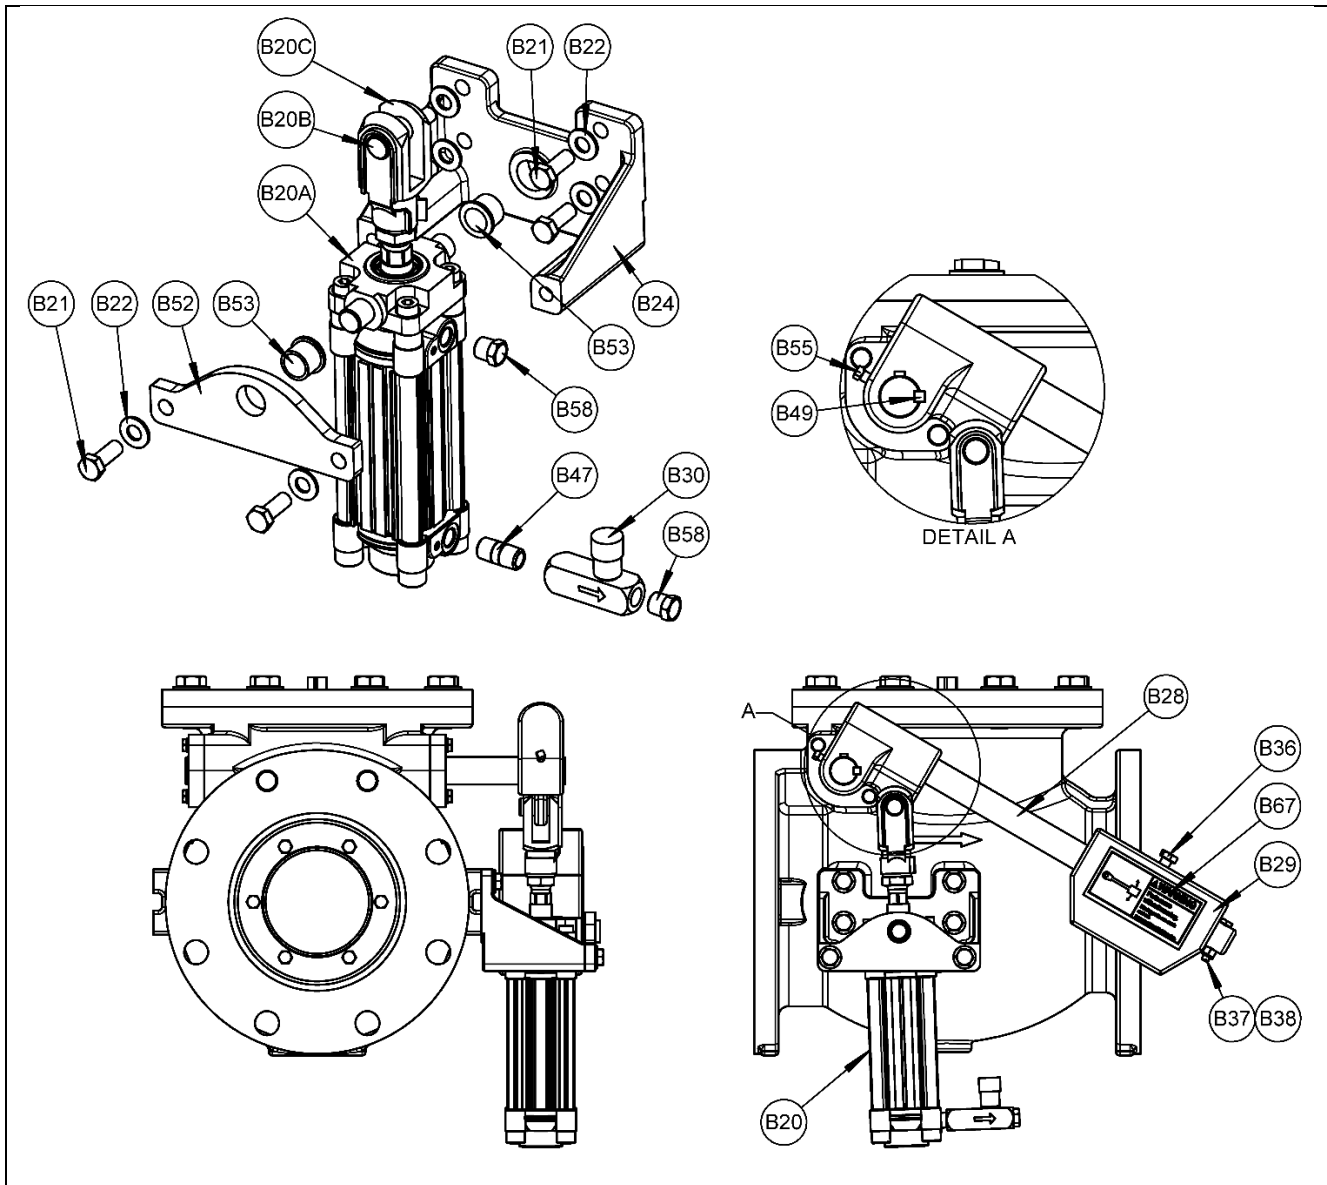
Lever & Weight with Air Cushion Cylinder (AC) Assembly
